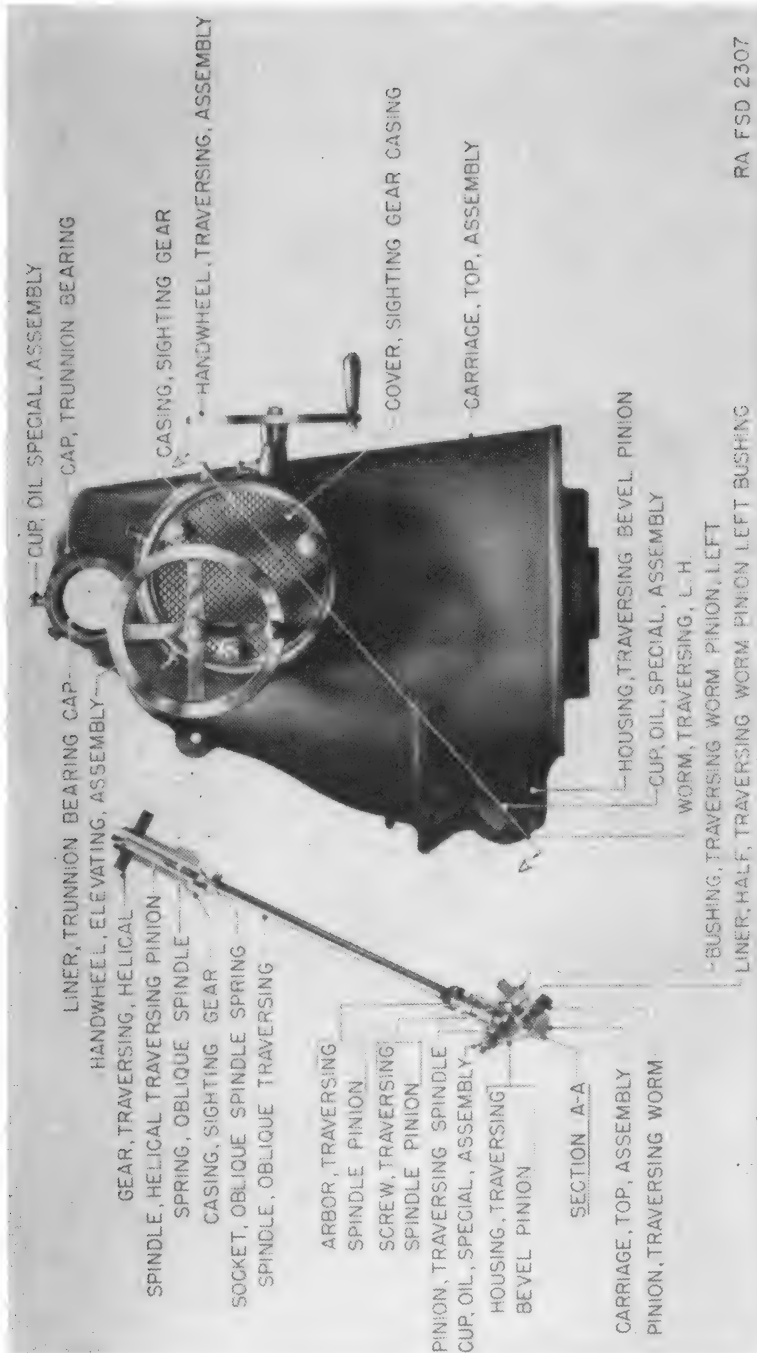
Top carriage—left side view showing elevating and traversing mechanism.
